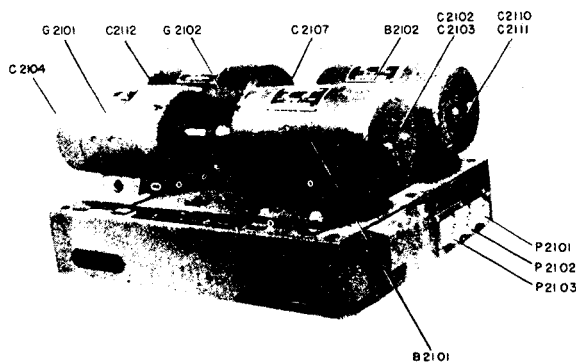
Motor Generator Power Unit Type -211100, and -21827-A. Front Perspective View
